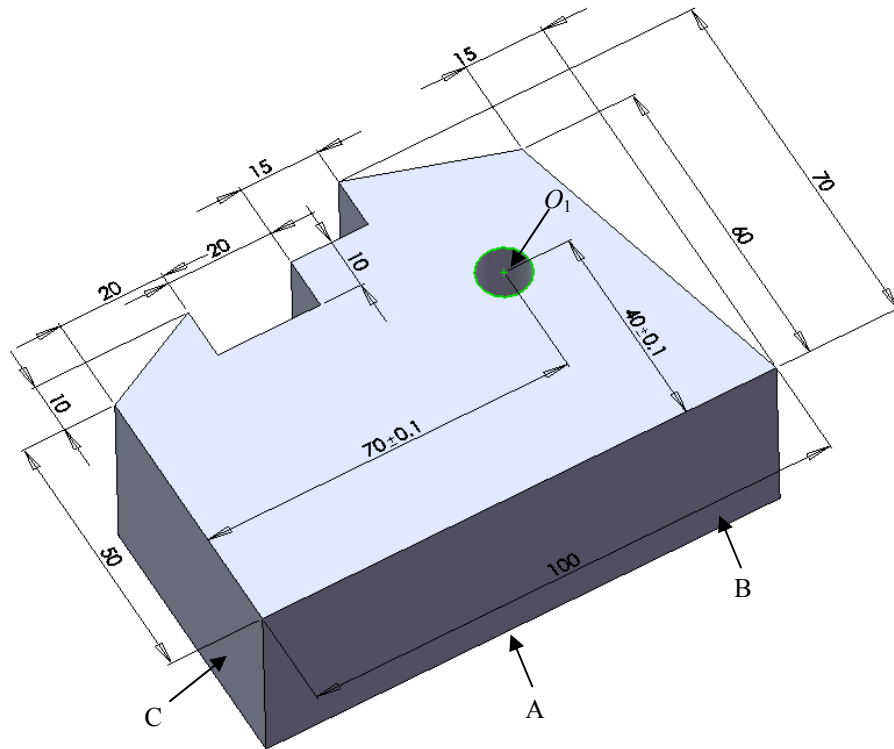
The workpiece for hole drilling (all dimension in *mm*).
